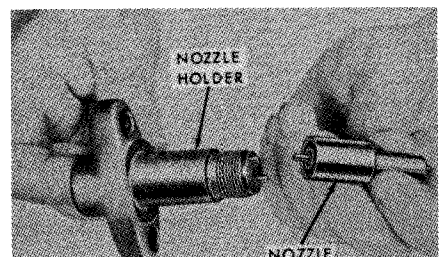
Be sure dowel pins in nozzle holder enter mating holes in nozzle body.
